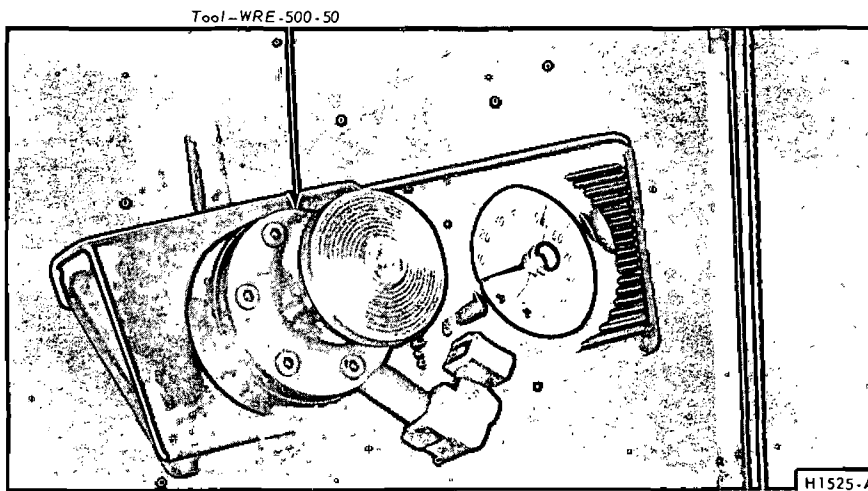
Brake Pedal Effort Gauge Installed — Typical
